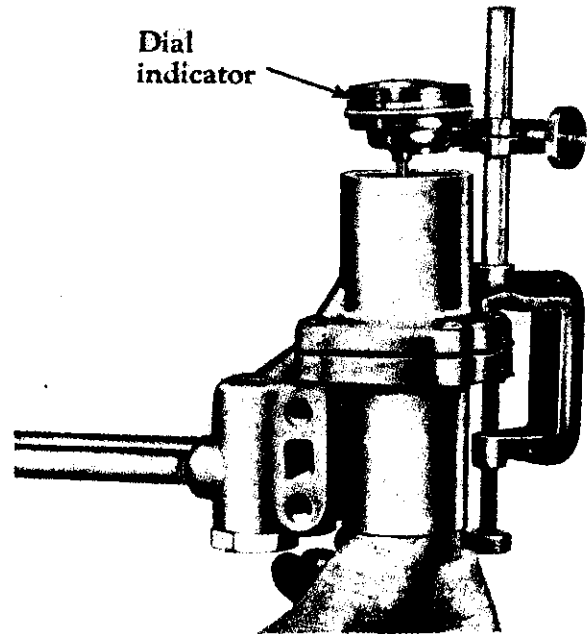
CHECKING VALVE TRAVEL (GOVERNOR)
